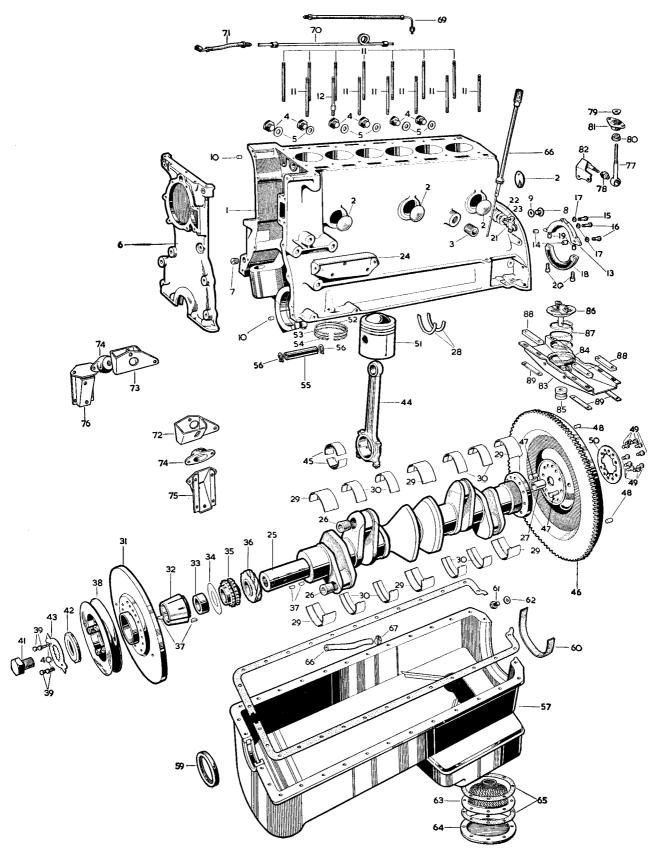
Exploded view of the cylinder block assembly (3.4 litre illustrated).
